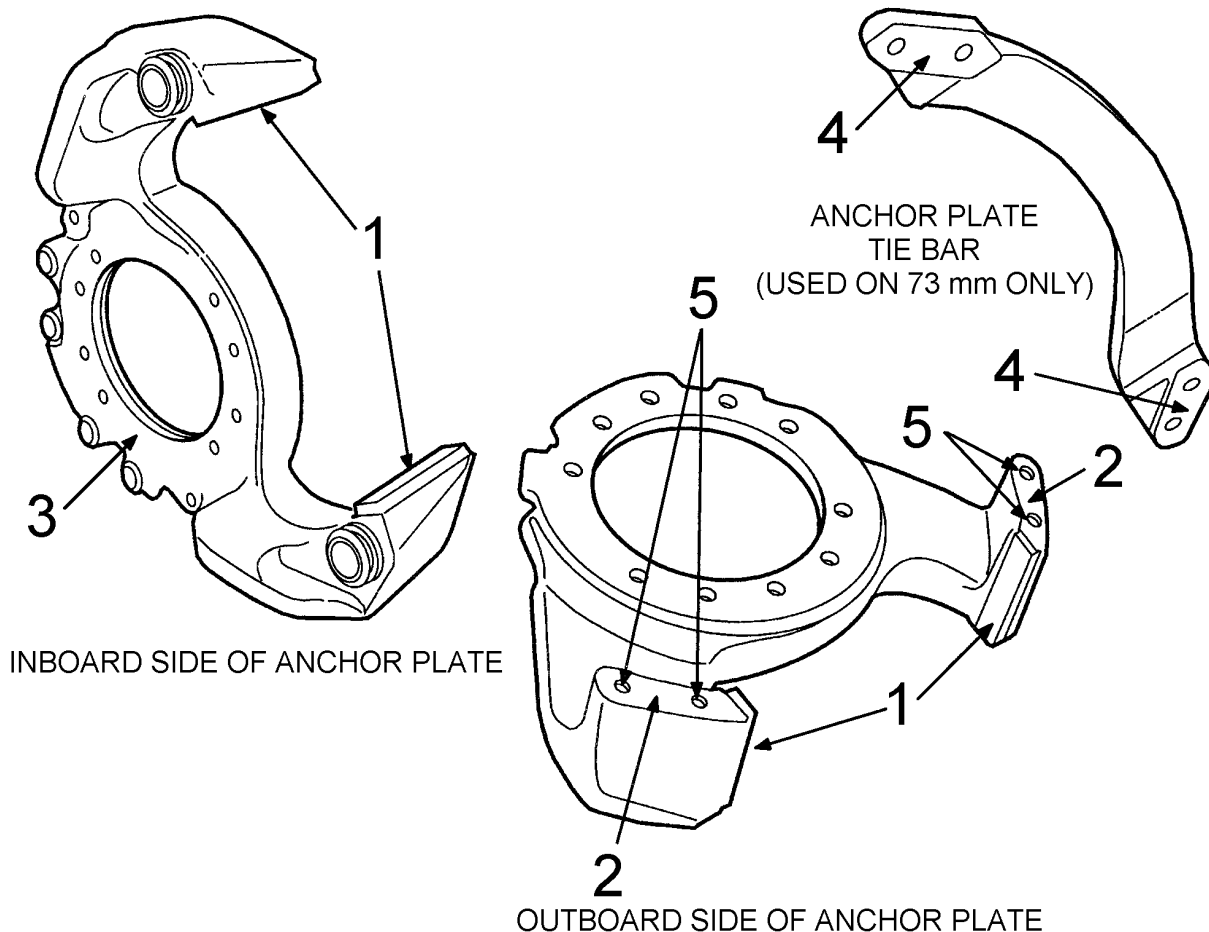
Clean And Inspect Anchor Plate Component Mating Surfaces
